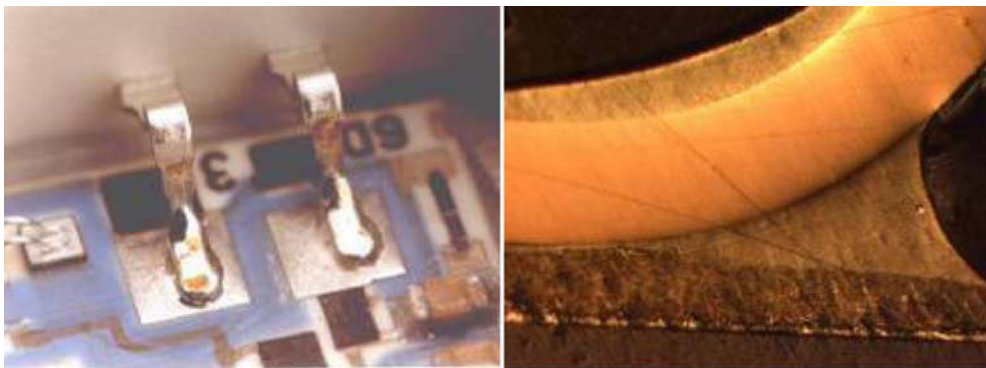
Detailed view of two solder joints (left) and cross-section of a laser-soldered joint (right).
